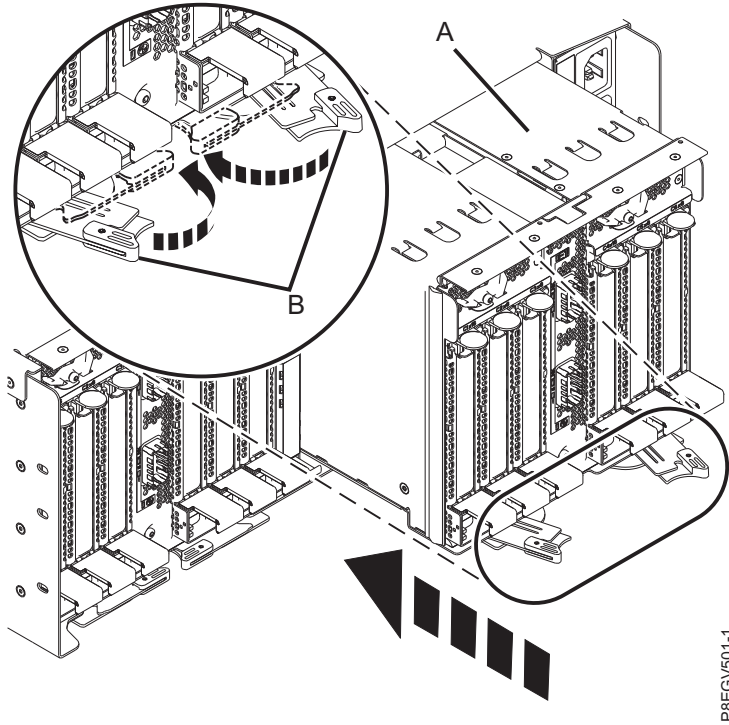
Closing the release latches on the PCIe3 6-slot fanout module
